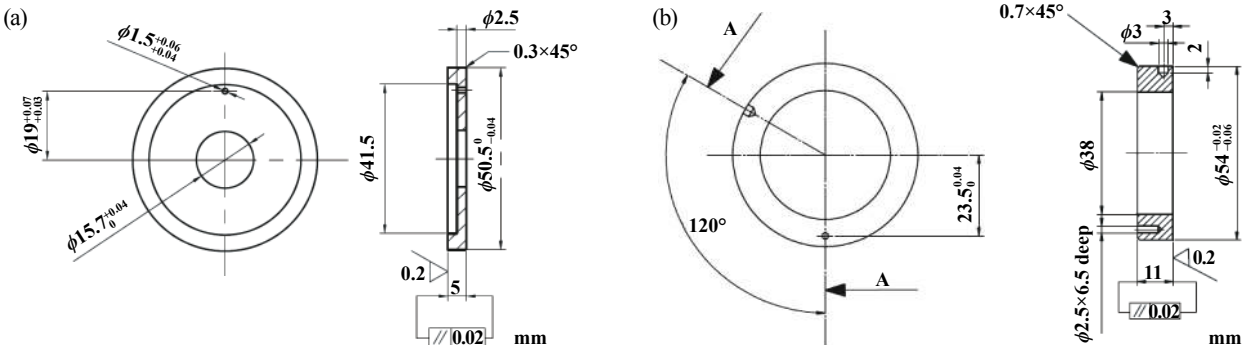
Shapes and dimensions of test samples: a. upper sample, rotational; b. lower sample, stationary
